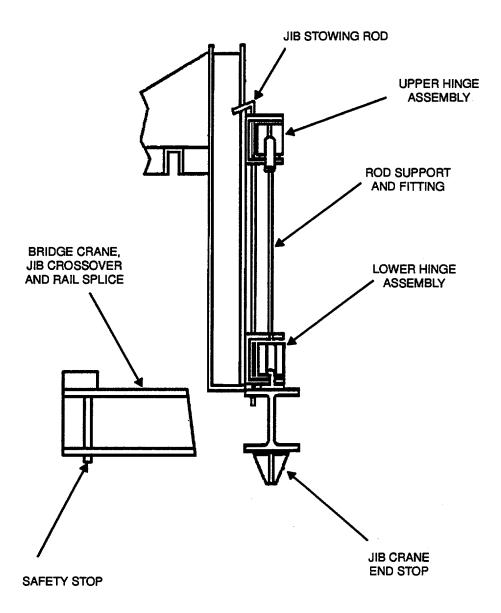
Bridge Crane Jib Rail (Stowed Toward Aft)
